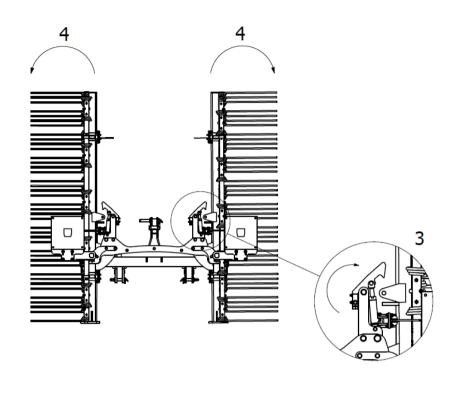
Implement opening sequence: 3- release the hook of the hydraulic side extension lock mechanism, 4- open the implement side extensions.
